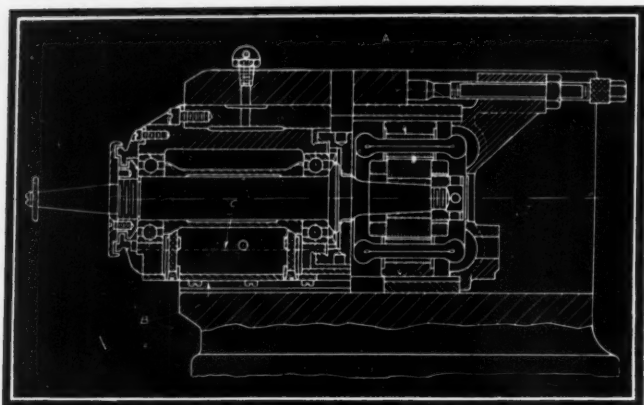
Rotor of electric motor is mounted direct on end of spindle. Preloaded bearings are employed in this application
